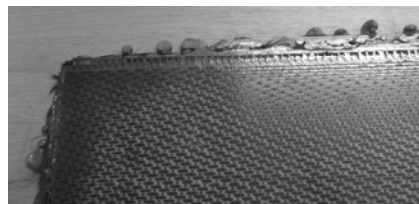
Edges of a composite plate after production; excess of resin should be cut away.
